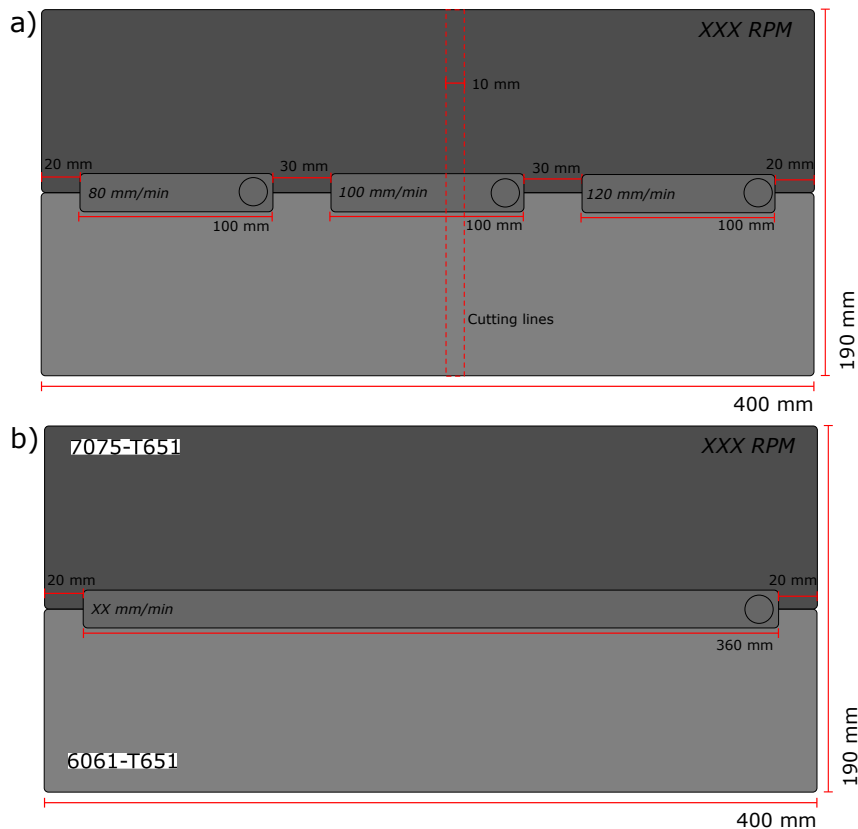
Schematic of multiple FSW joints on a *butt-joined* dissimilar Al configuration. (a) For microstructural analysis and tensile testing, 10mm wide rectangular shaped sample are extracted. Each plate contains three welds at various advancing speed. (b) 360 mm *butt-joined* weld for fatigue sample manufacturing on a dissimilar and similar Al assembly is done.
